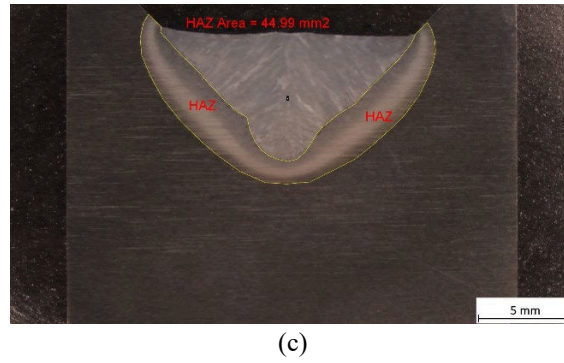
Macrographs of welded samples. (a) CW0; (b) CW5 and (c) CW10.
